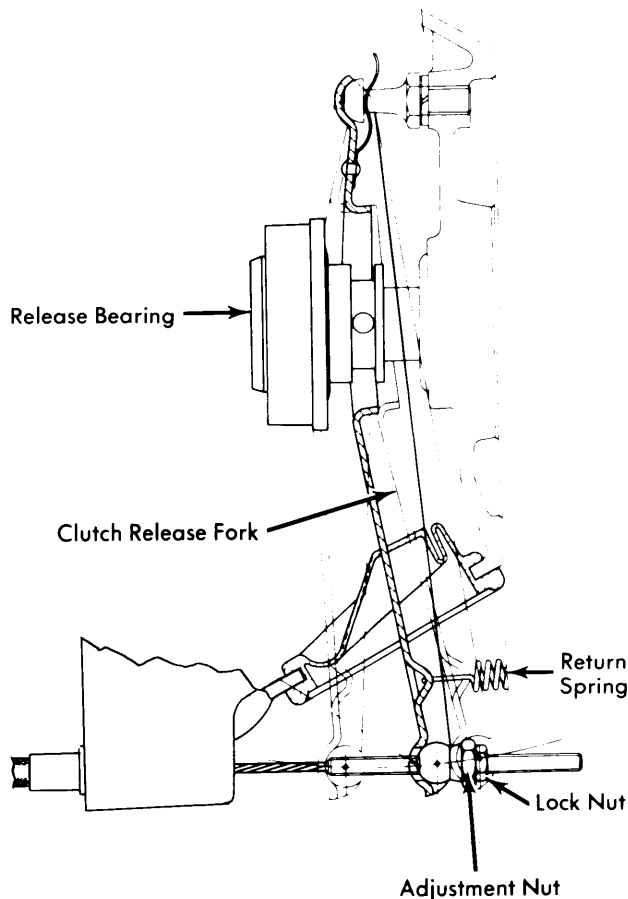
Clutch Actuating Components Showing Cable Adjustment Point
